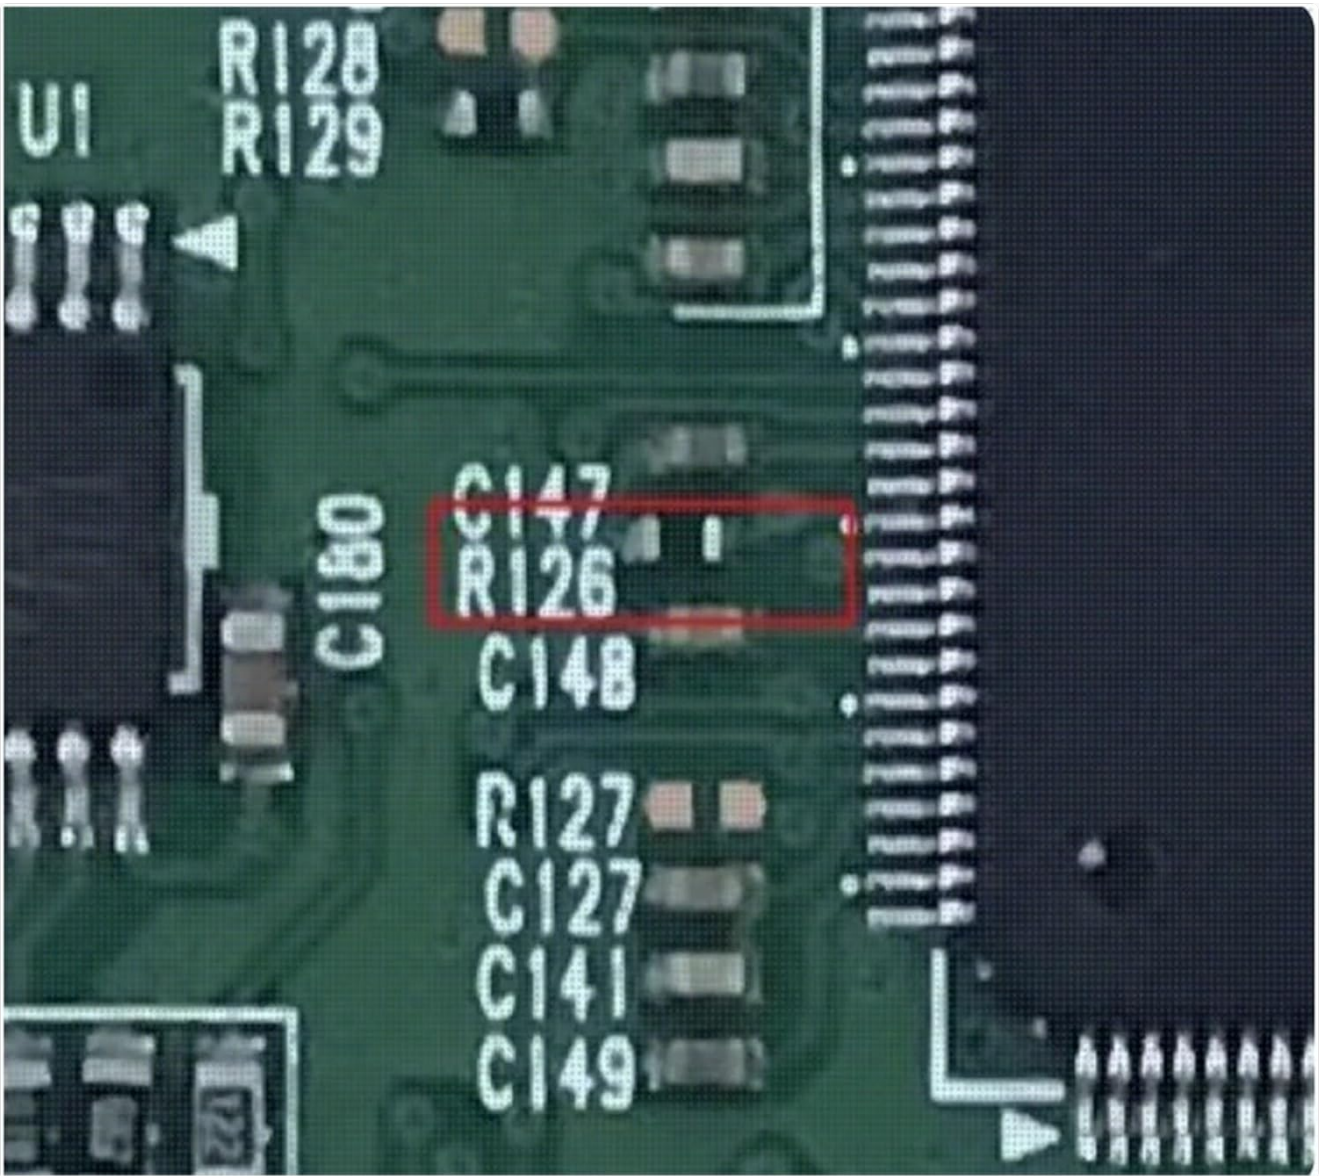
Front view of the IOAUOVEG 6870C-0552A T-Con Logic Board. This image shows the main components and connectors on the board.
